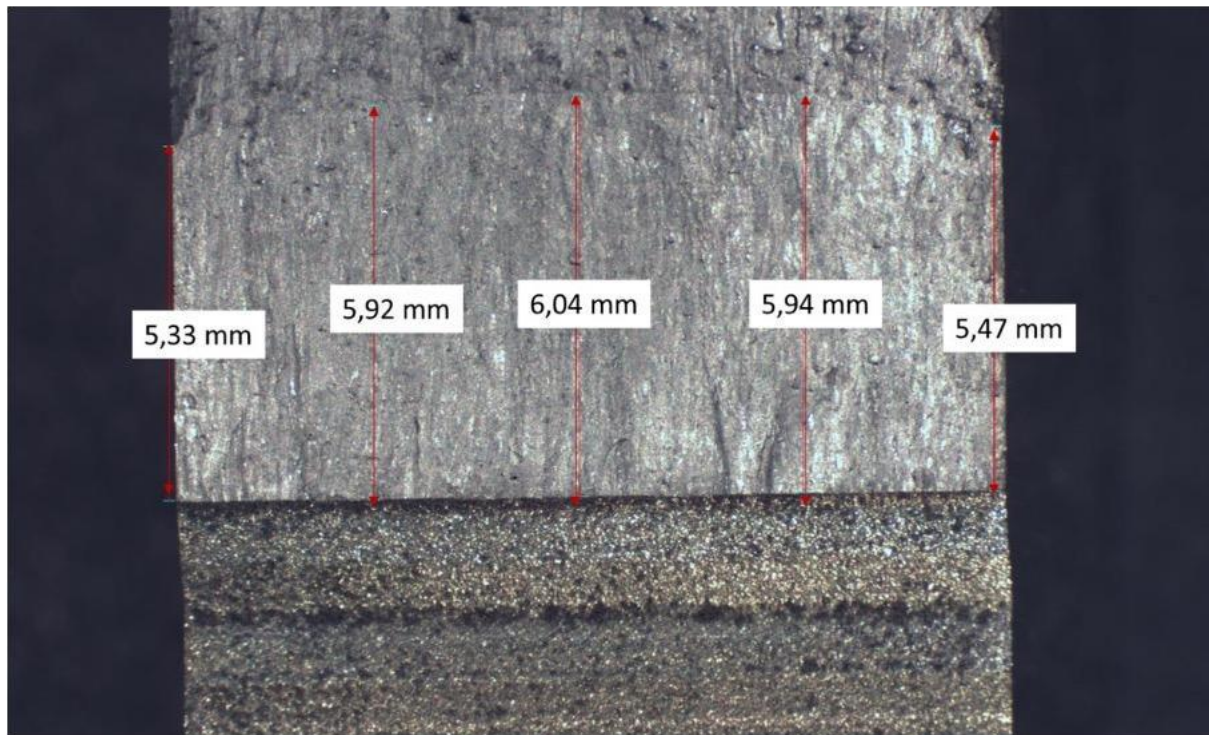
Fracture toughness crack measurement for 6.25 m/s 1
